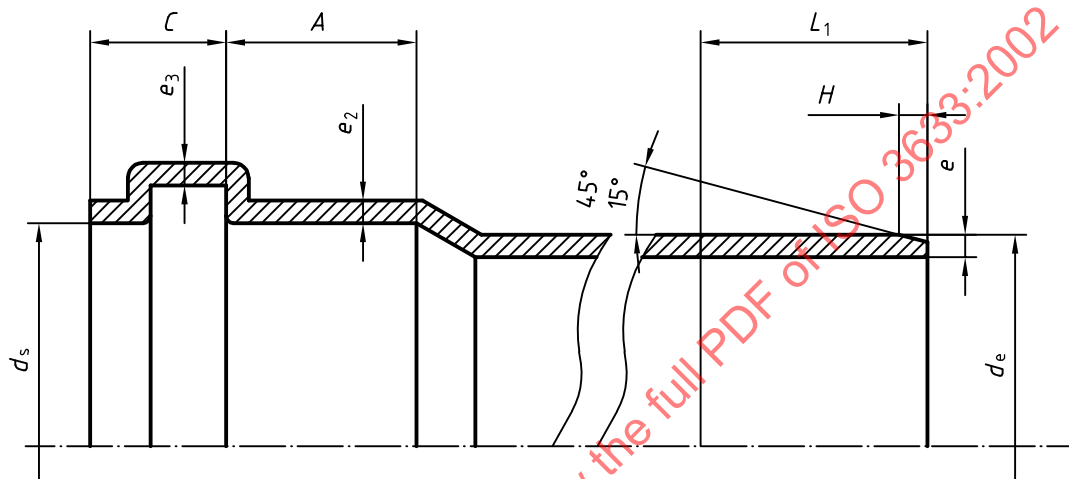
Basic dimensions of sockets and spigots for elastomeric ring seal joints
